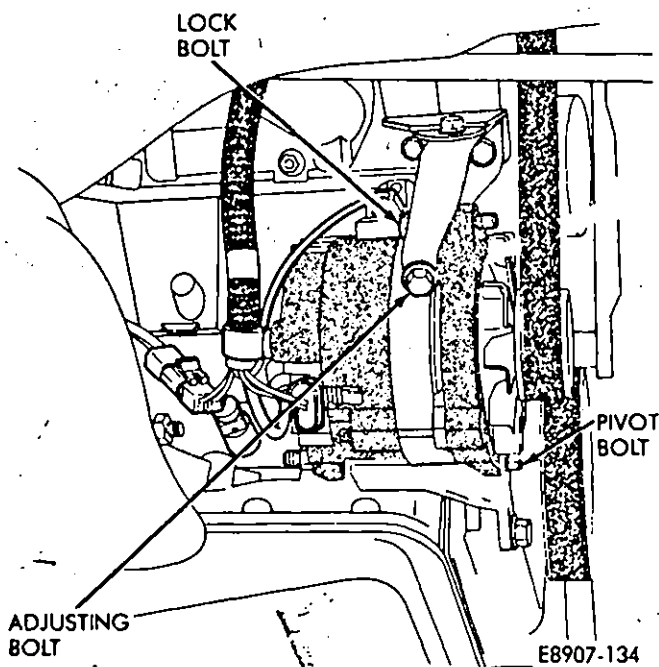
Alternator Pivot Bolt, Lockbolt and Adjusting Bolt—3.0L Engine
